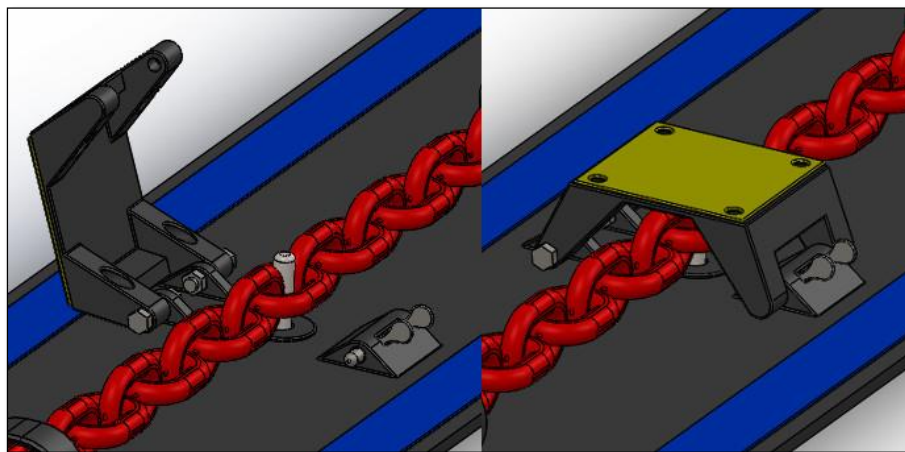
Flip for mounting of the tightening mechanism above the chain
